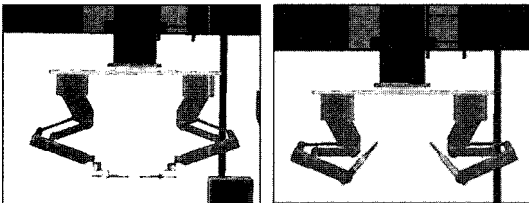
AS-IS & TO-BE model of welding robots.
